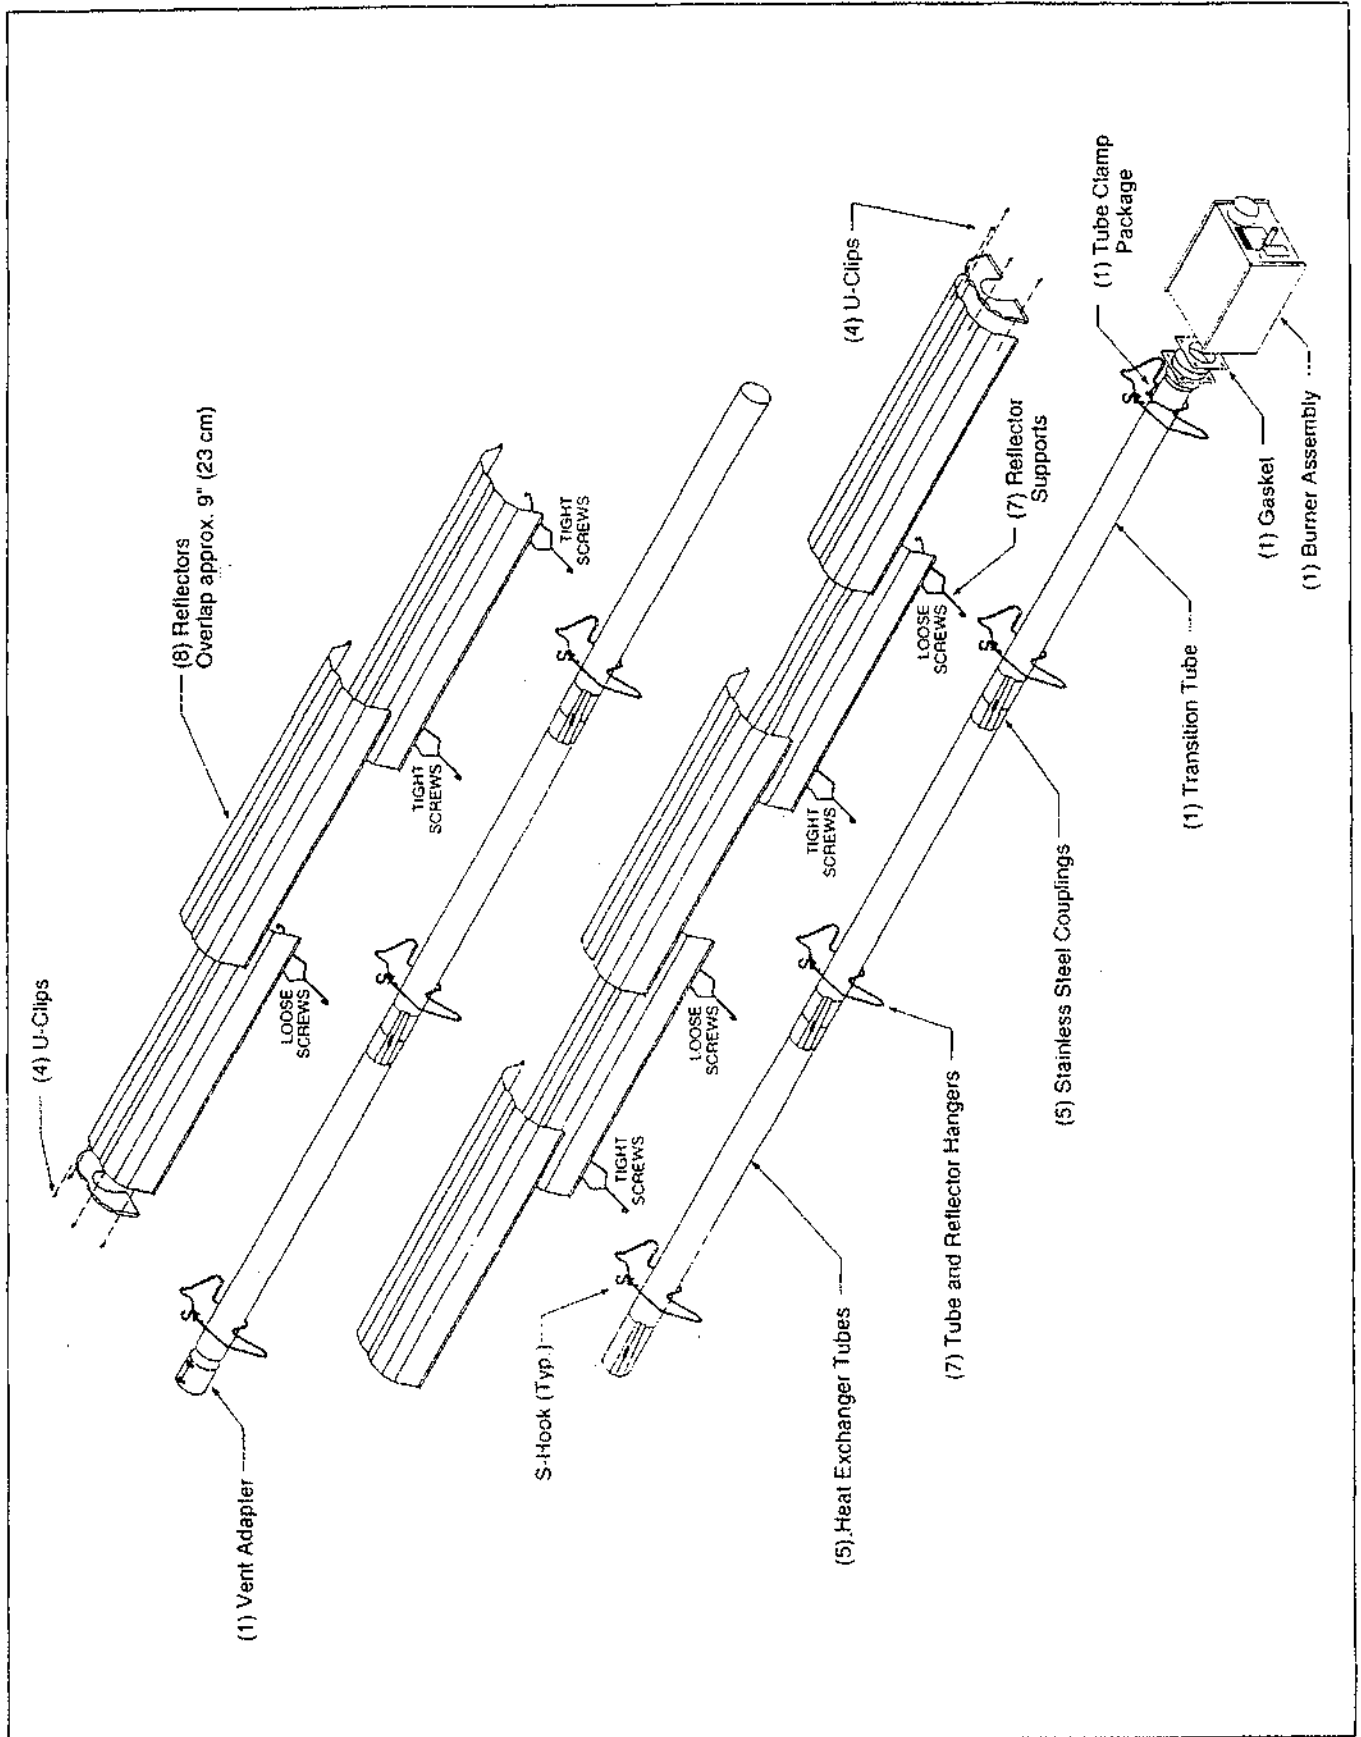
Assembly of 60 ft (18 m) Heat Exchanger System
